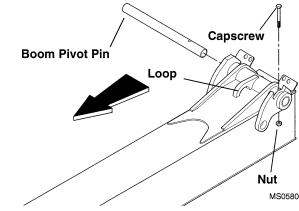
Remove the capscrew and nut securing the boom pivot pin to the outer boom.
